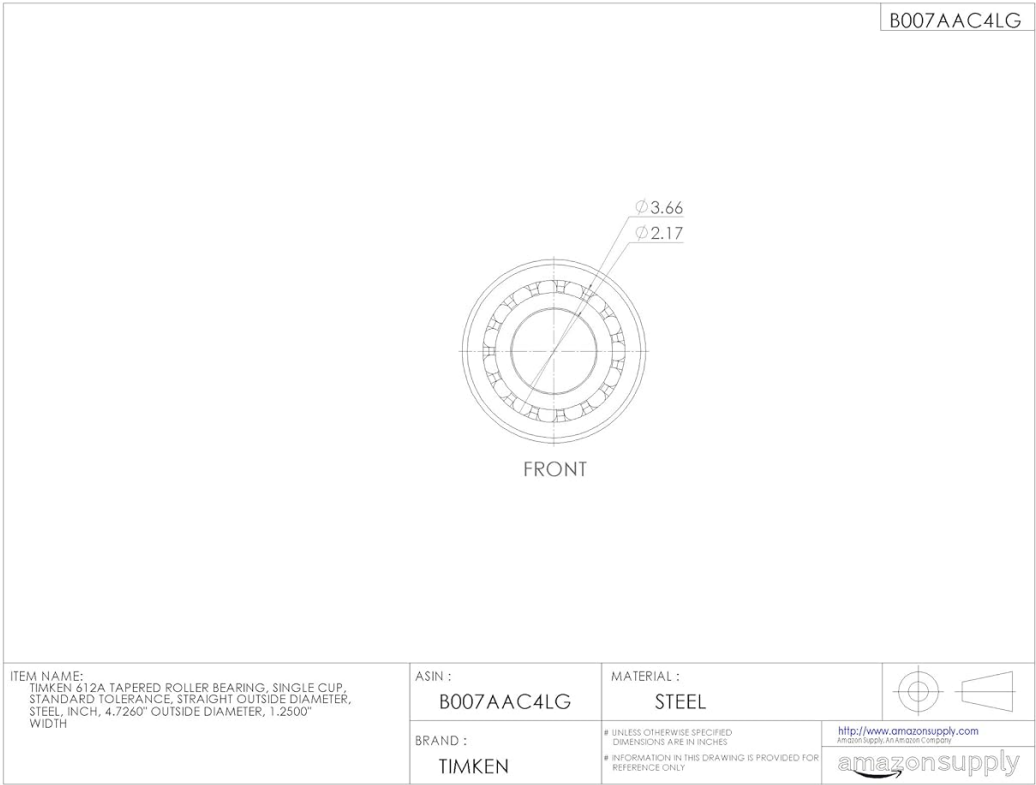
Front View Technical Drawing. Illustrates the bearing's frontal dimensions and internal structure.
